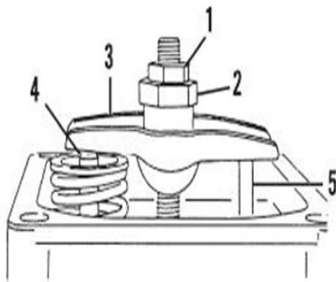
Valve clearance should be 0.13-0.17 mm (0.005-0.007 in.) for intake and 0.18-0.22 mm (0.007-0.009 in.) for exhaust. Loosen rocker arm jam nut (1) and turn adjusting nut (2) to obtain desired clearance.
